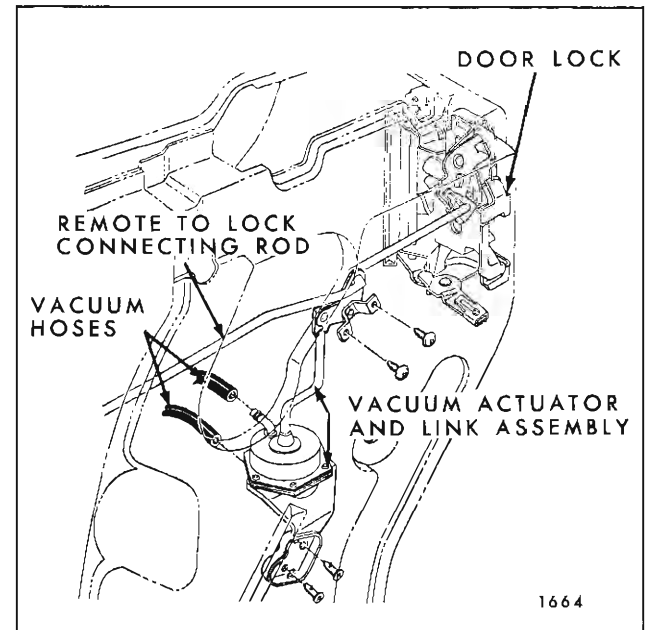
D82—Rear Door Vacuum Lock Actuator and Link Assembly - 68069 Style
